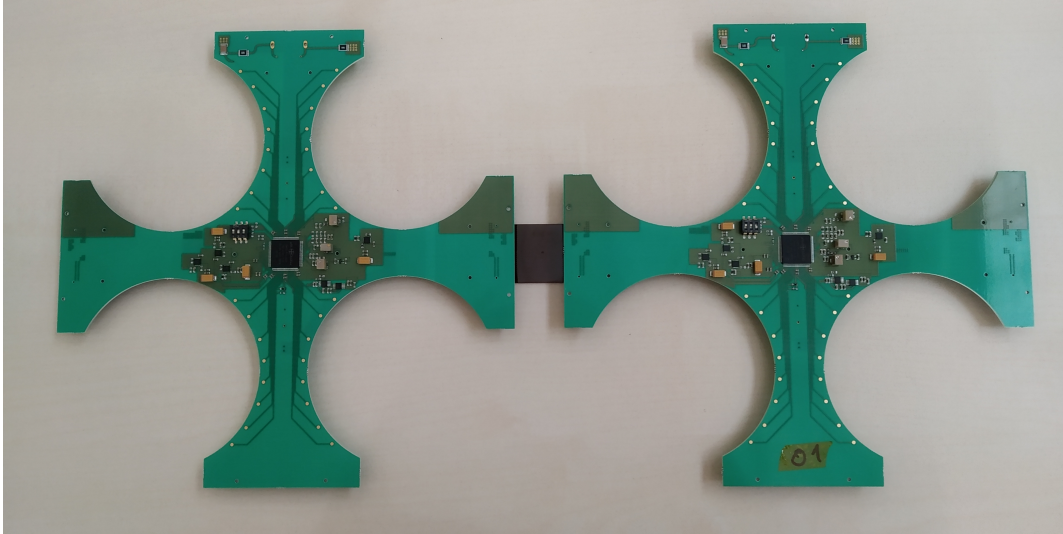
two front-end boards, with a mounted ASIC, connected via one flex-rigid board.
